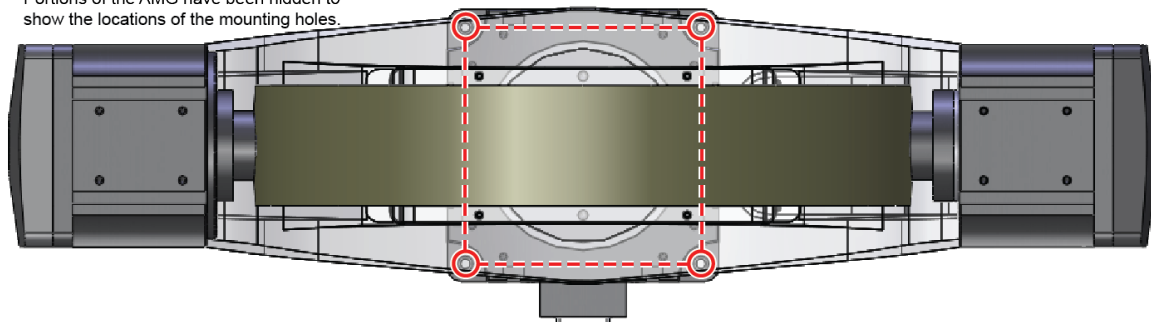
View of an AMG Stage Showing Mounting Holes
